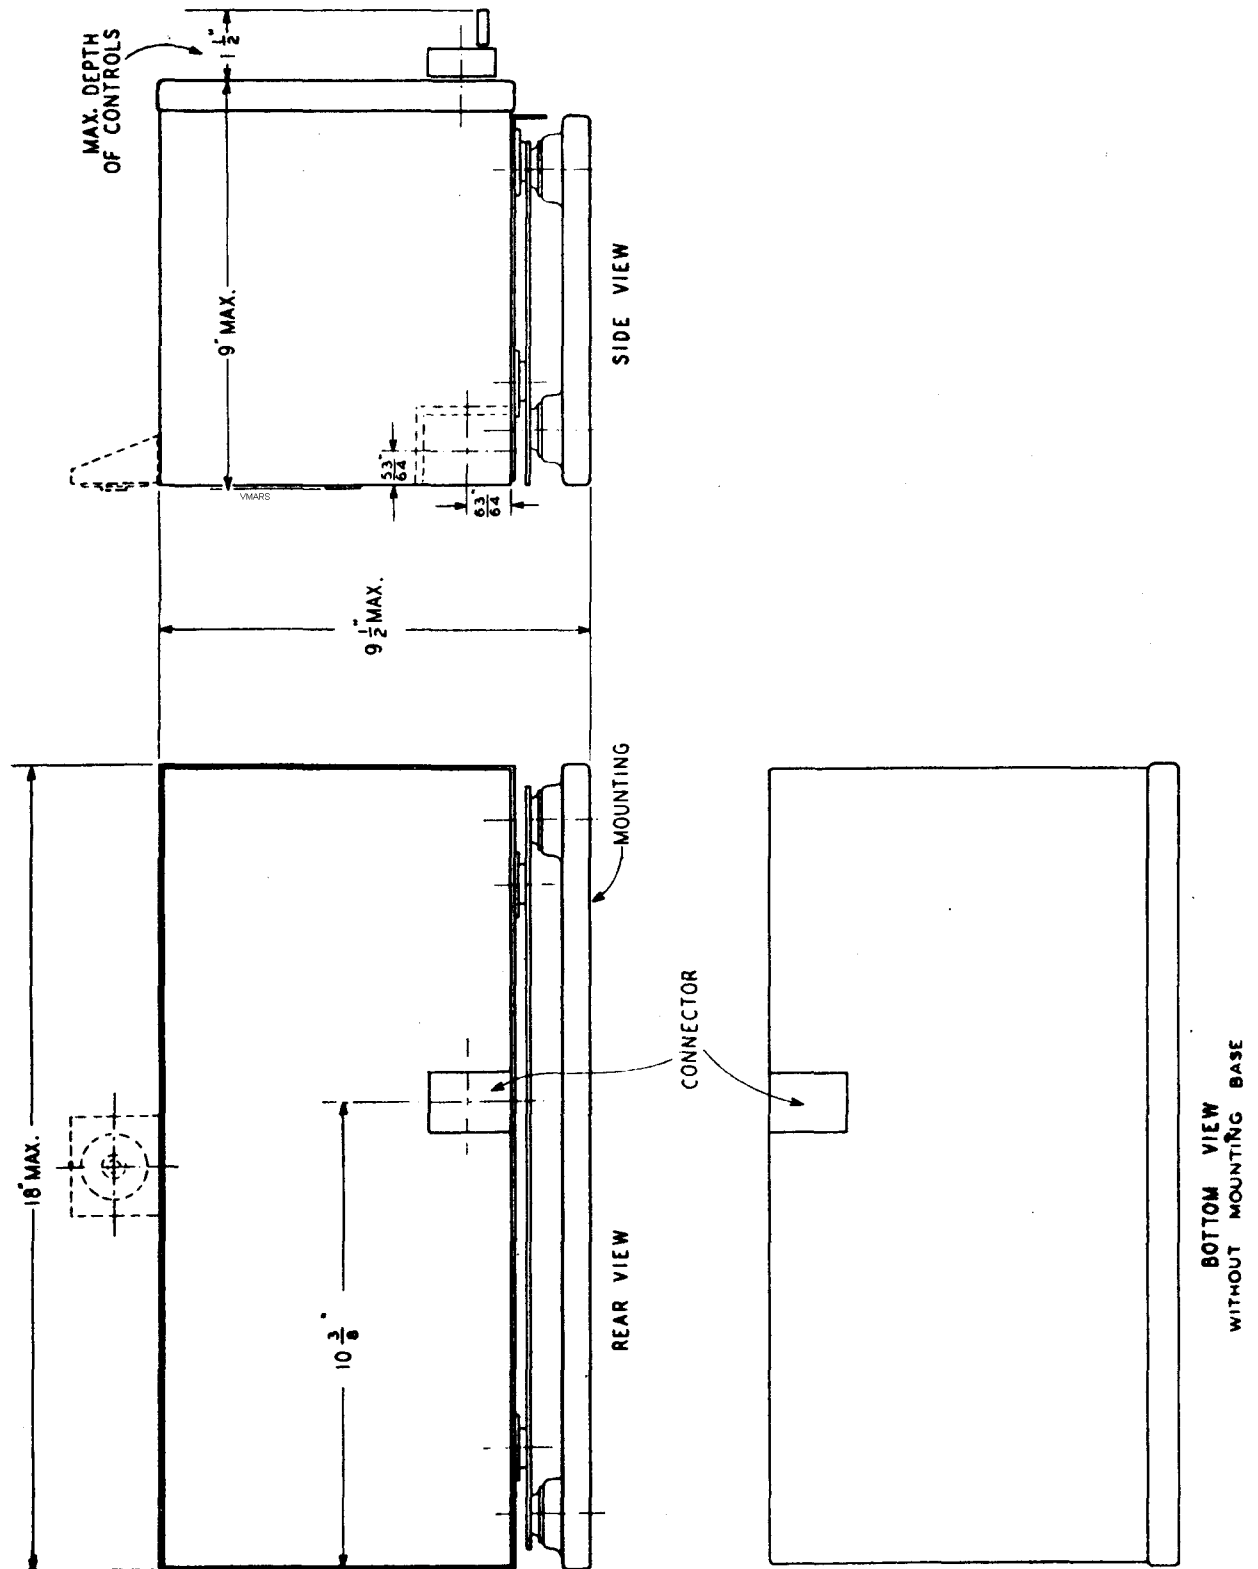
Radio Receiver BC-348-J, Outline Dimensional Sketch
